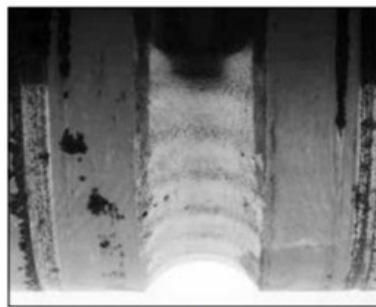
Shock loading caused brinell damage on this ball bearing inner ring.
